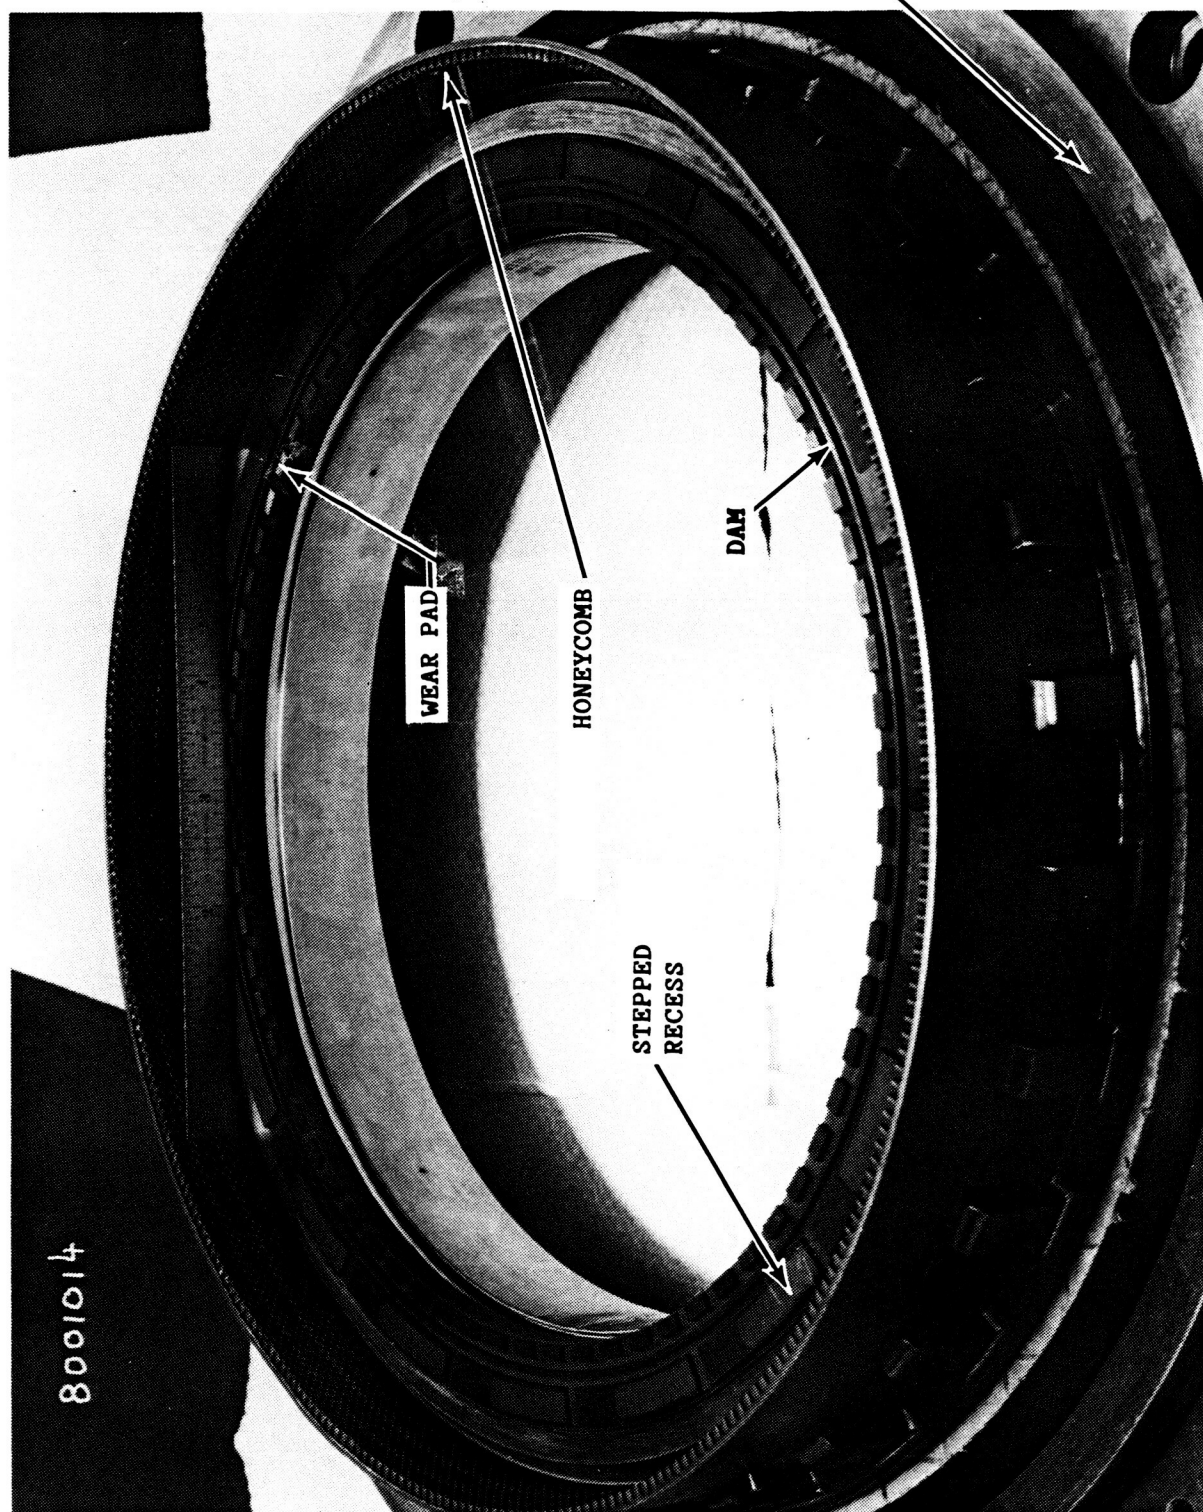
Stepped Pad Seal Assembly, Before Build 21.
